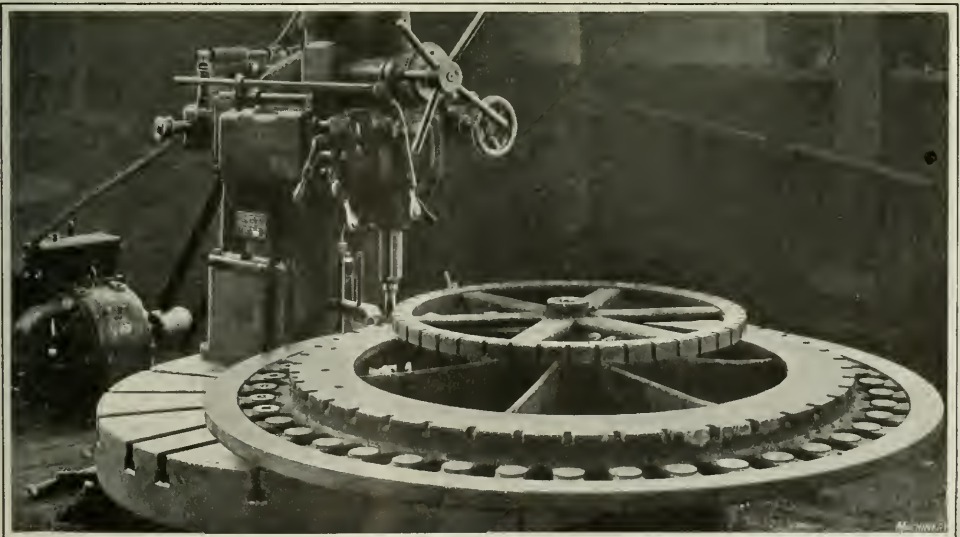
Drilling Head mounted on a Boring Mill Table for handling Work of Large Diameter
